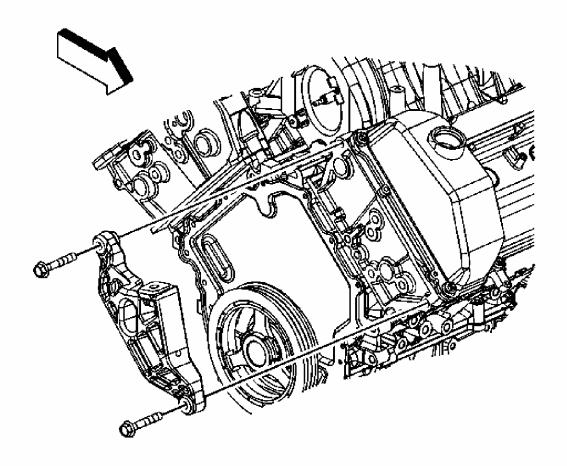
View Of Engine Mount Strut Bracket-To-Engine Bolts Courtesy of GENERAL MOTORS CORP.
